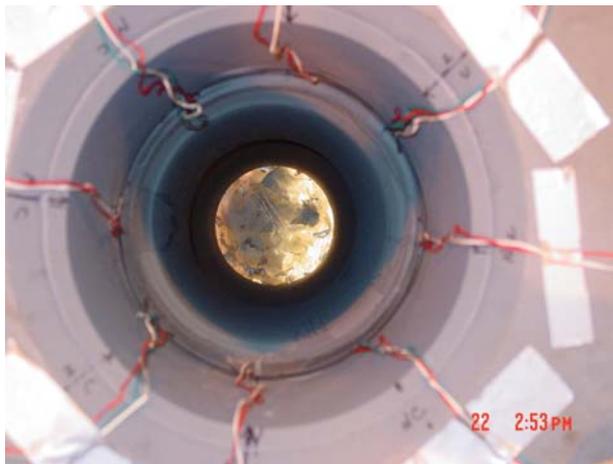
(a) Illustration of the Instrumented Strain Gauges Installed on the ID Surface Near the Weld Location of the Mockup Pressurizer Nozzle
